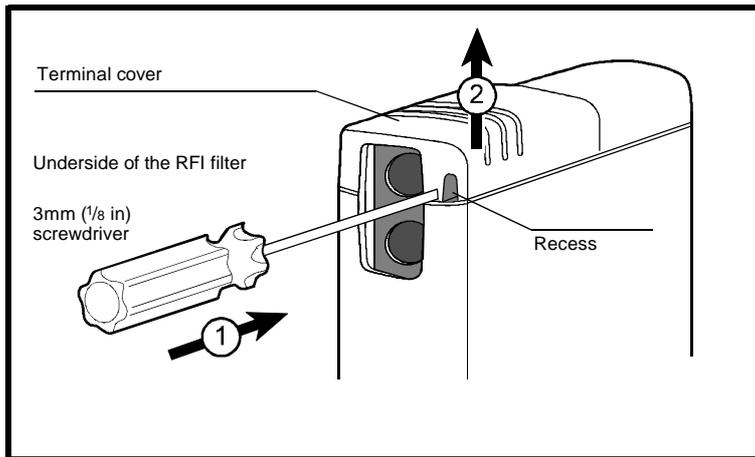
Tool removal of the Filter Terminal Cover for access
